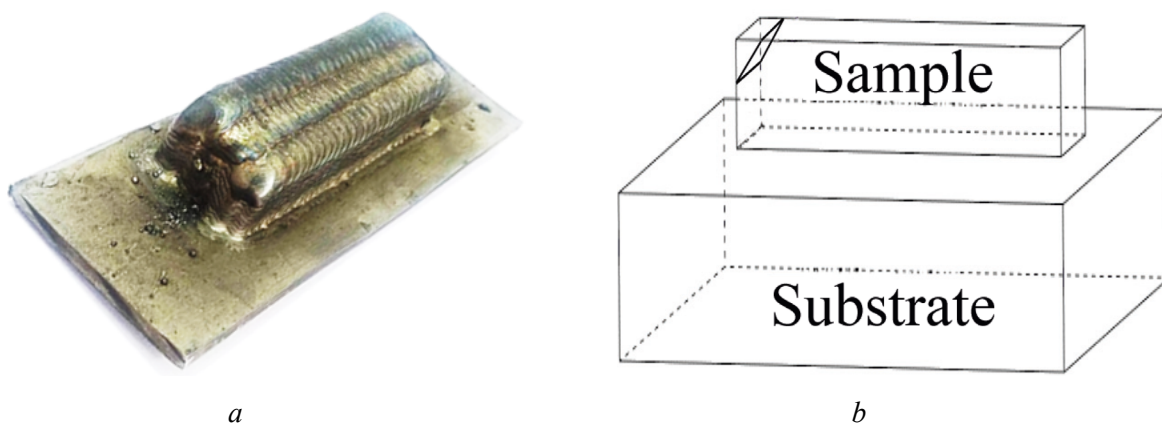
Photograph of a printed workpiece (a) using *WAAM* technology and a diagram of the sample cutout (b) for research
